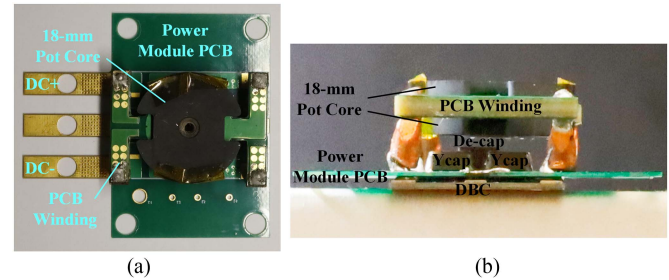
Prototype for the designed power module package with the integrated CMF. (a) Top view. (b) Side view.
